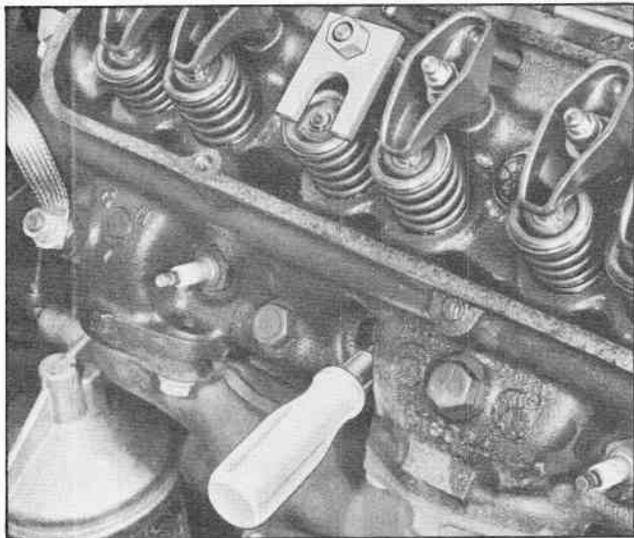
Valve Spring Compressor and Valve Holder Installed
